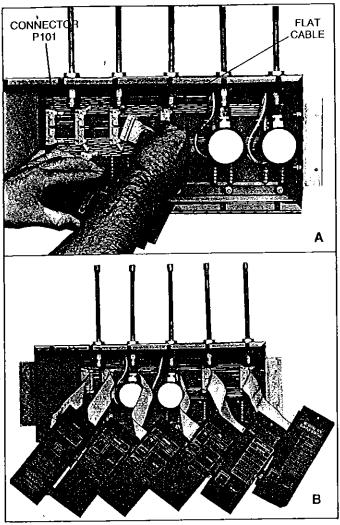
FLAT CABLE CONNECTION TO P.C. BOARD
